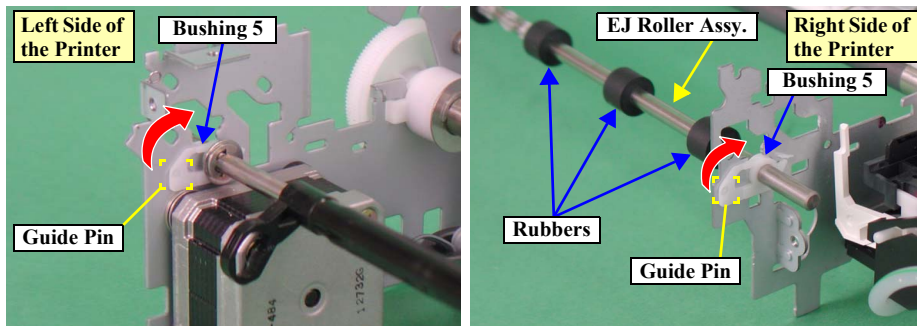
Removing the Front Paper Guide and EJ Roller Assy. (3)
